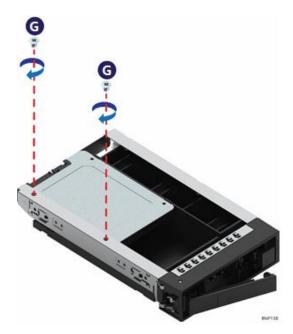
2.5" SSD Assembly Installation to Drive Carrier (Step 8)
